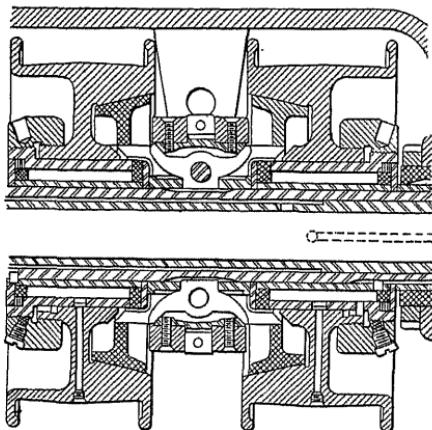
Sectional view of Brown & Sharpe reversing cone clutch.
